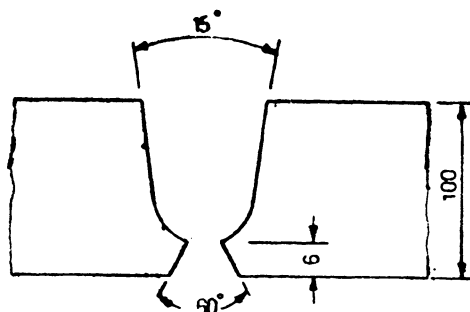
'4. U groove geometry for SAW. Bottom groove welded by SMAW.
